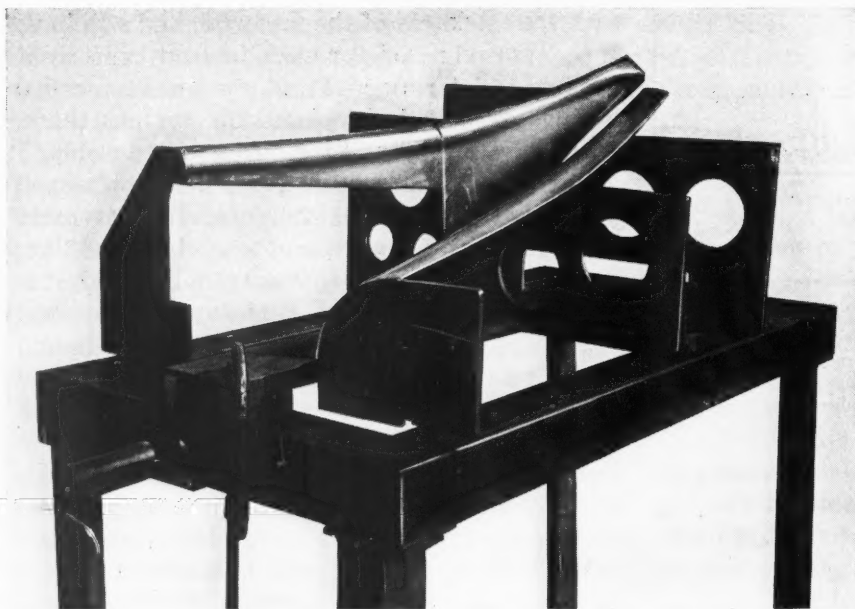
Contoured sheets are fastened to "formers" by screws instead of tack-welding to prevent distortion. The "formers" are made and located on the fixture base by the use of templates
